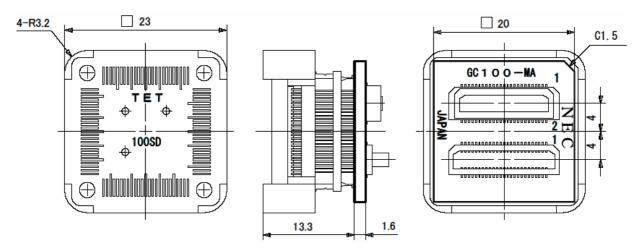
Mount Adapter for V850E/IA4 (100-Pin GC Package)
